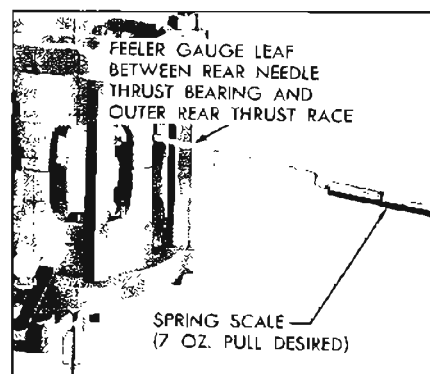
Checking "Drag" on Selected Feeler Gauge Leaf with Spring Scale
